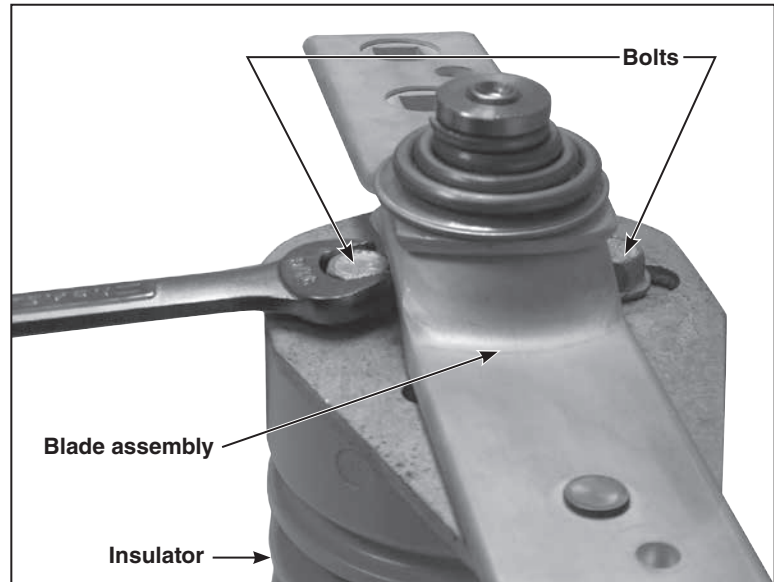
Loosen the bolts securing the blade assembly to the interrupter.
